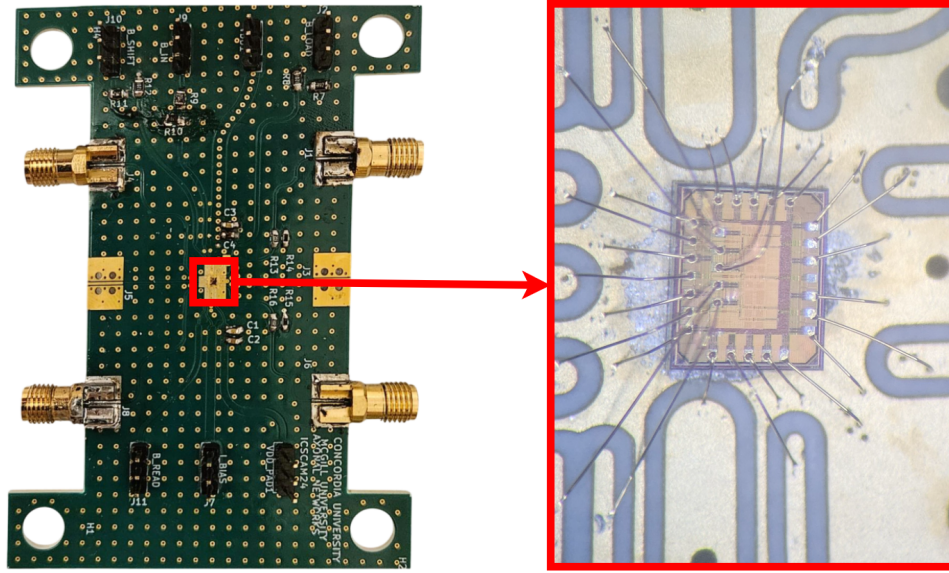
High-speed test PCB with the wire-bonded fabricated chip mounted for electrical measurements.
